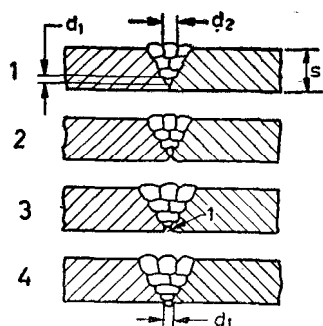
SINGLE V-BUTT WELD WITHOUT SEALING RUN
